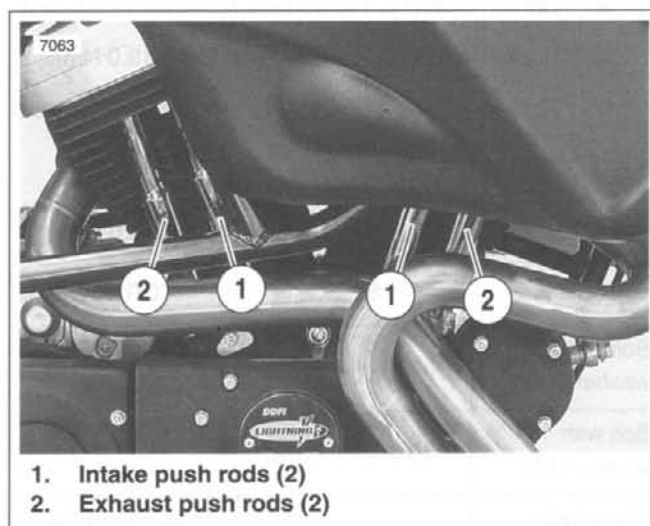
Push Rod Locations (Shown on Assembled Engine)
